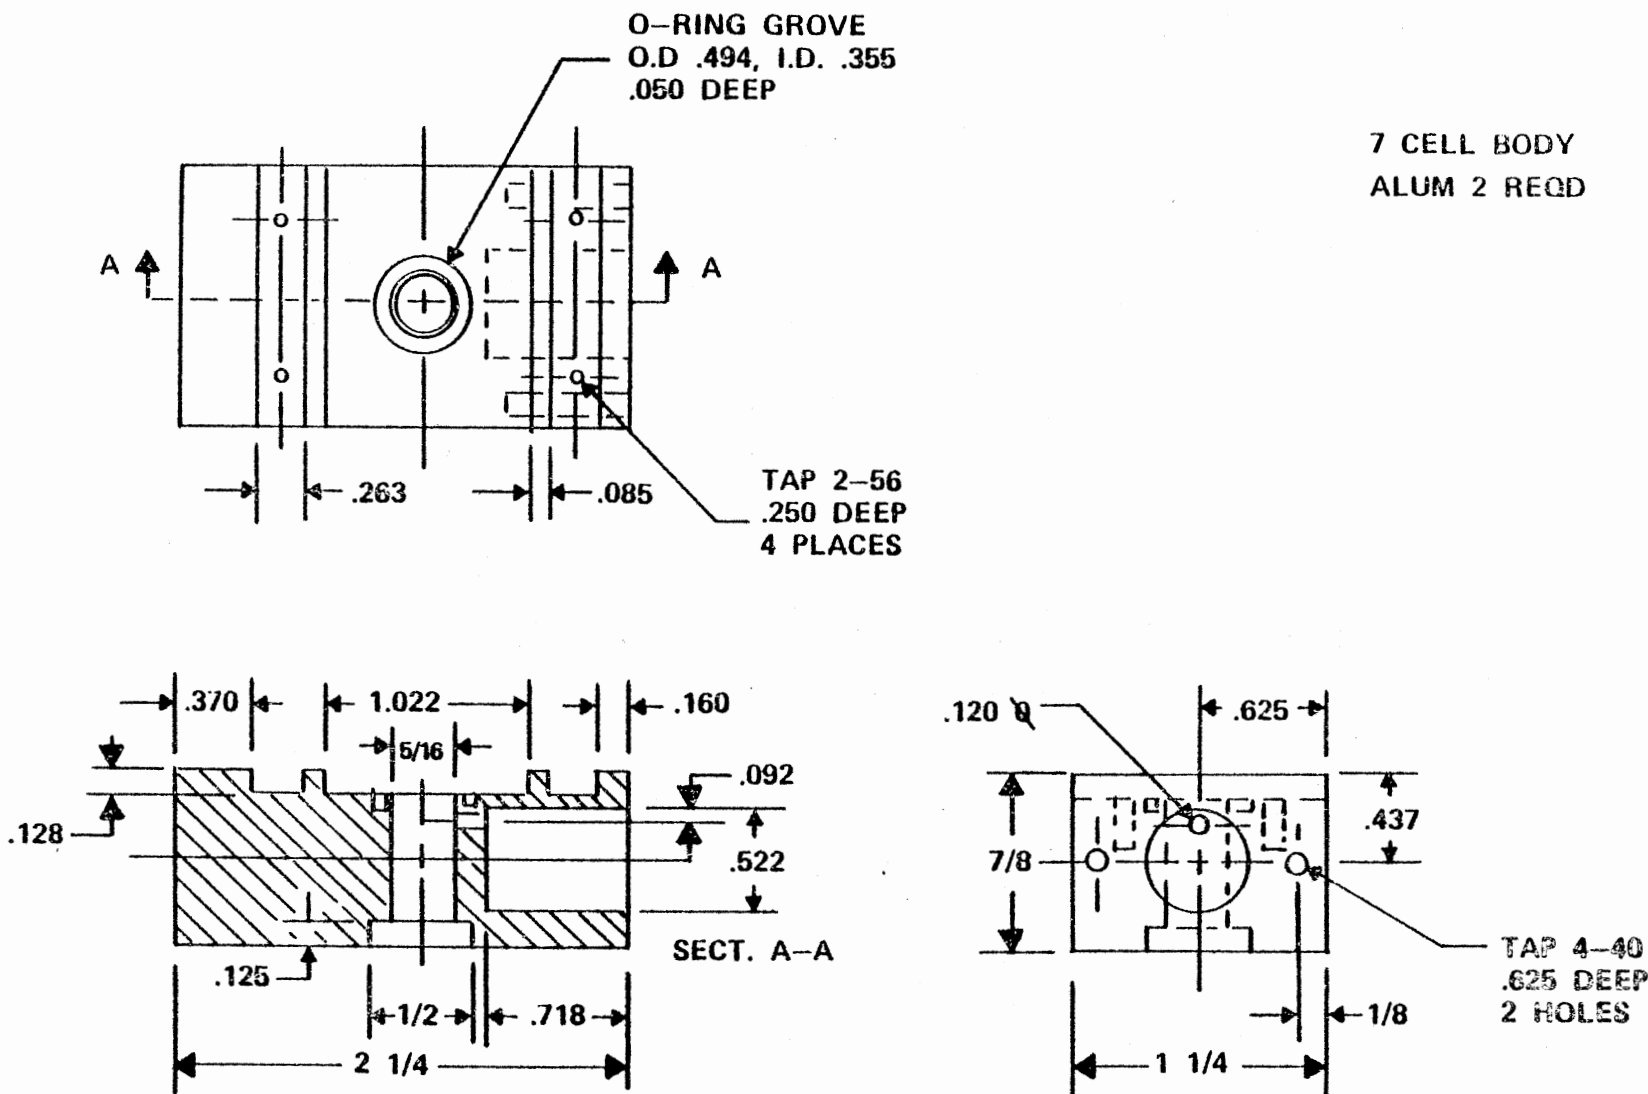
Detailed Mechanical Drawing of Photoacoustic Cell
